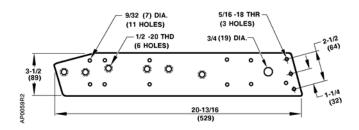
Actuator Mounting Plate 331-623, 1/4-Inch (6 mm) Thick.
